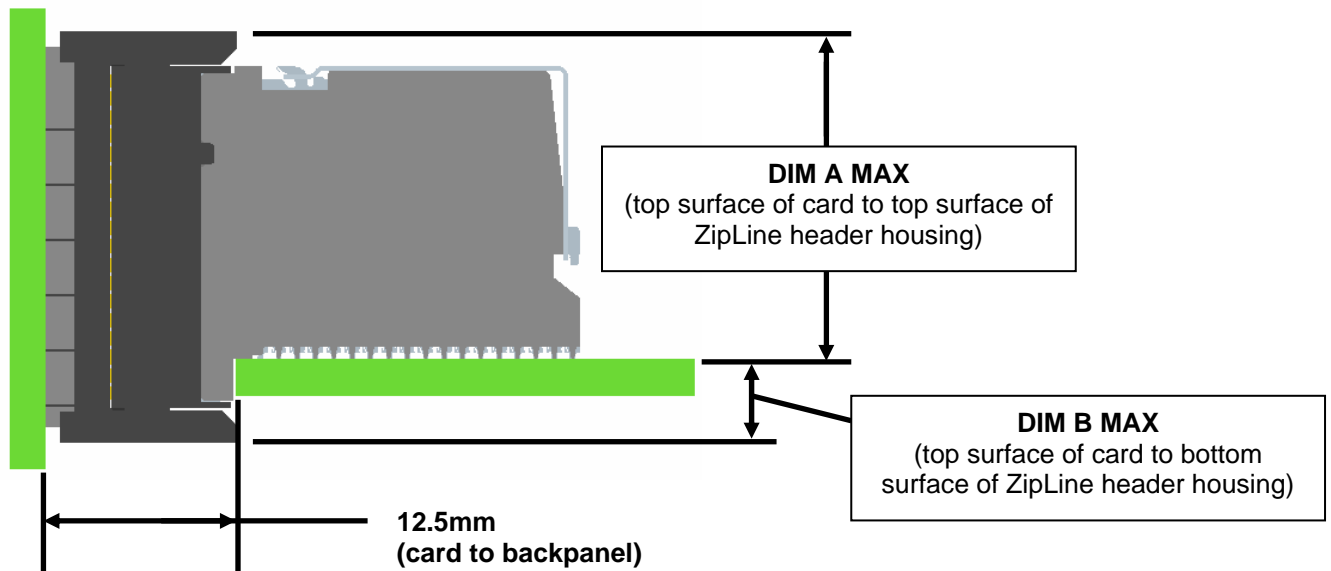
end view of the ZipLine™ Connector System (6 pair connectors shown)
